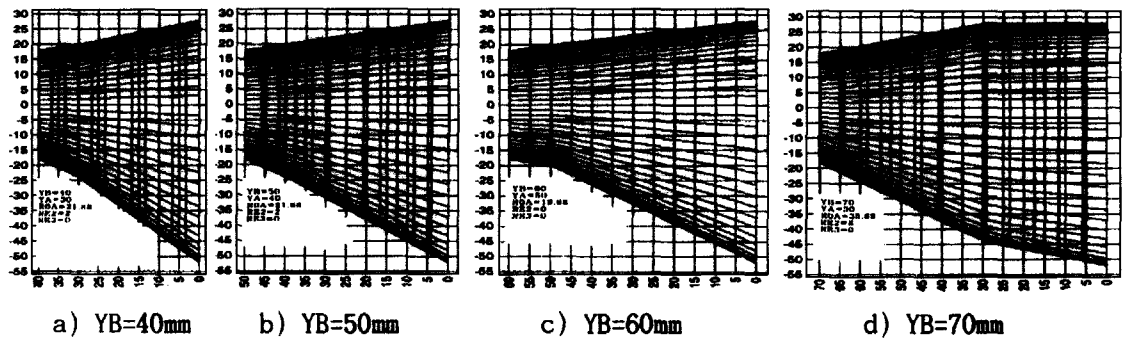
Dead Metal Zone of plane dies (RE1=12mm)
